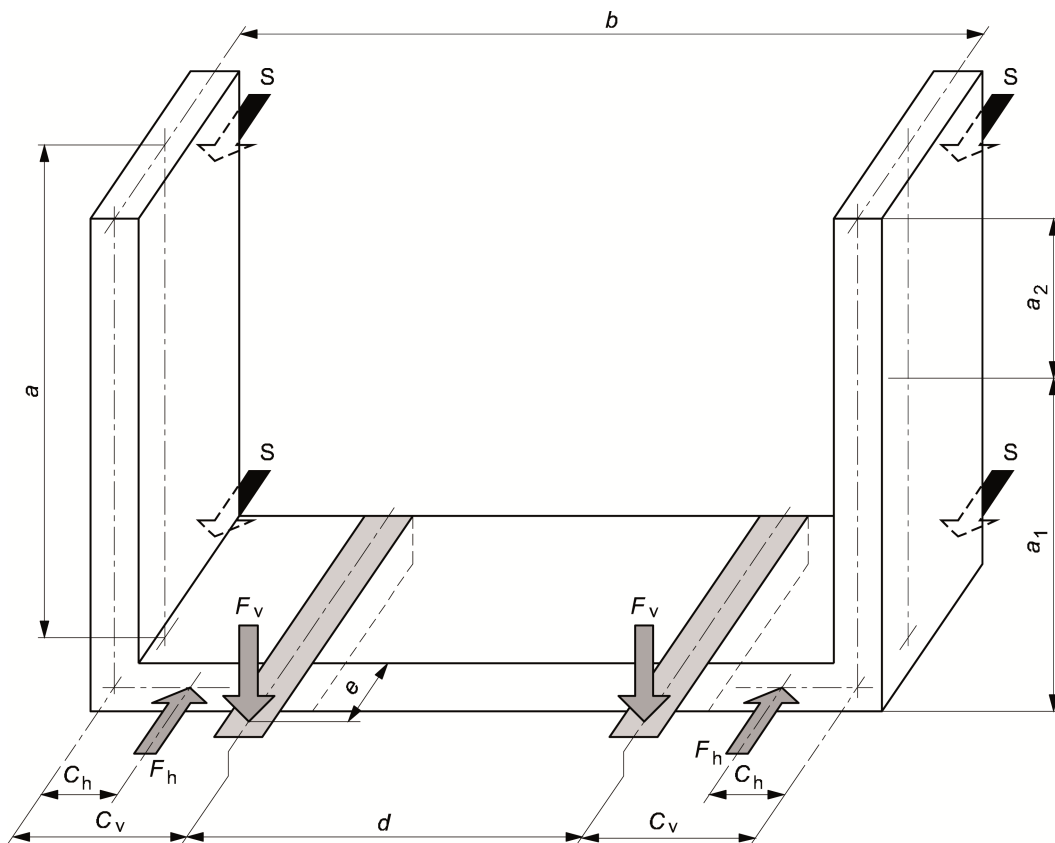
Schematic L-connection and loading points (any connection method can be chosen)
